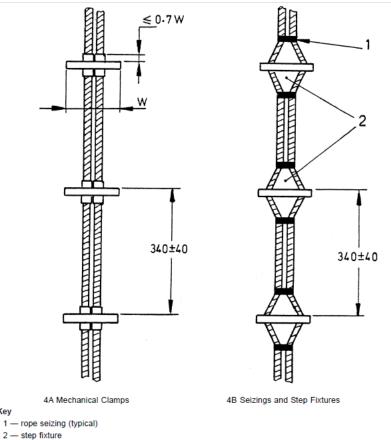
Alternate Ladder Construction Using Mechanical Clamps and Seizings and Step Fixtures
